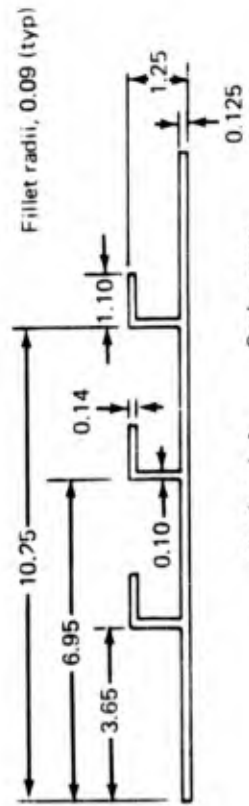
NOMINAL DIMENSIONS FOR TYPE II PANELS
